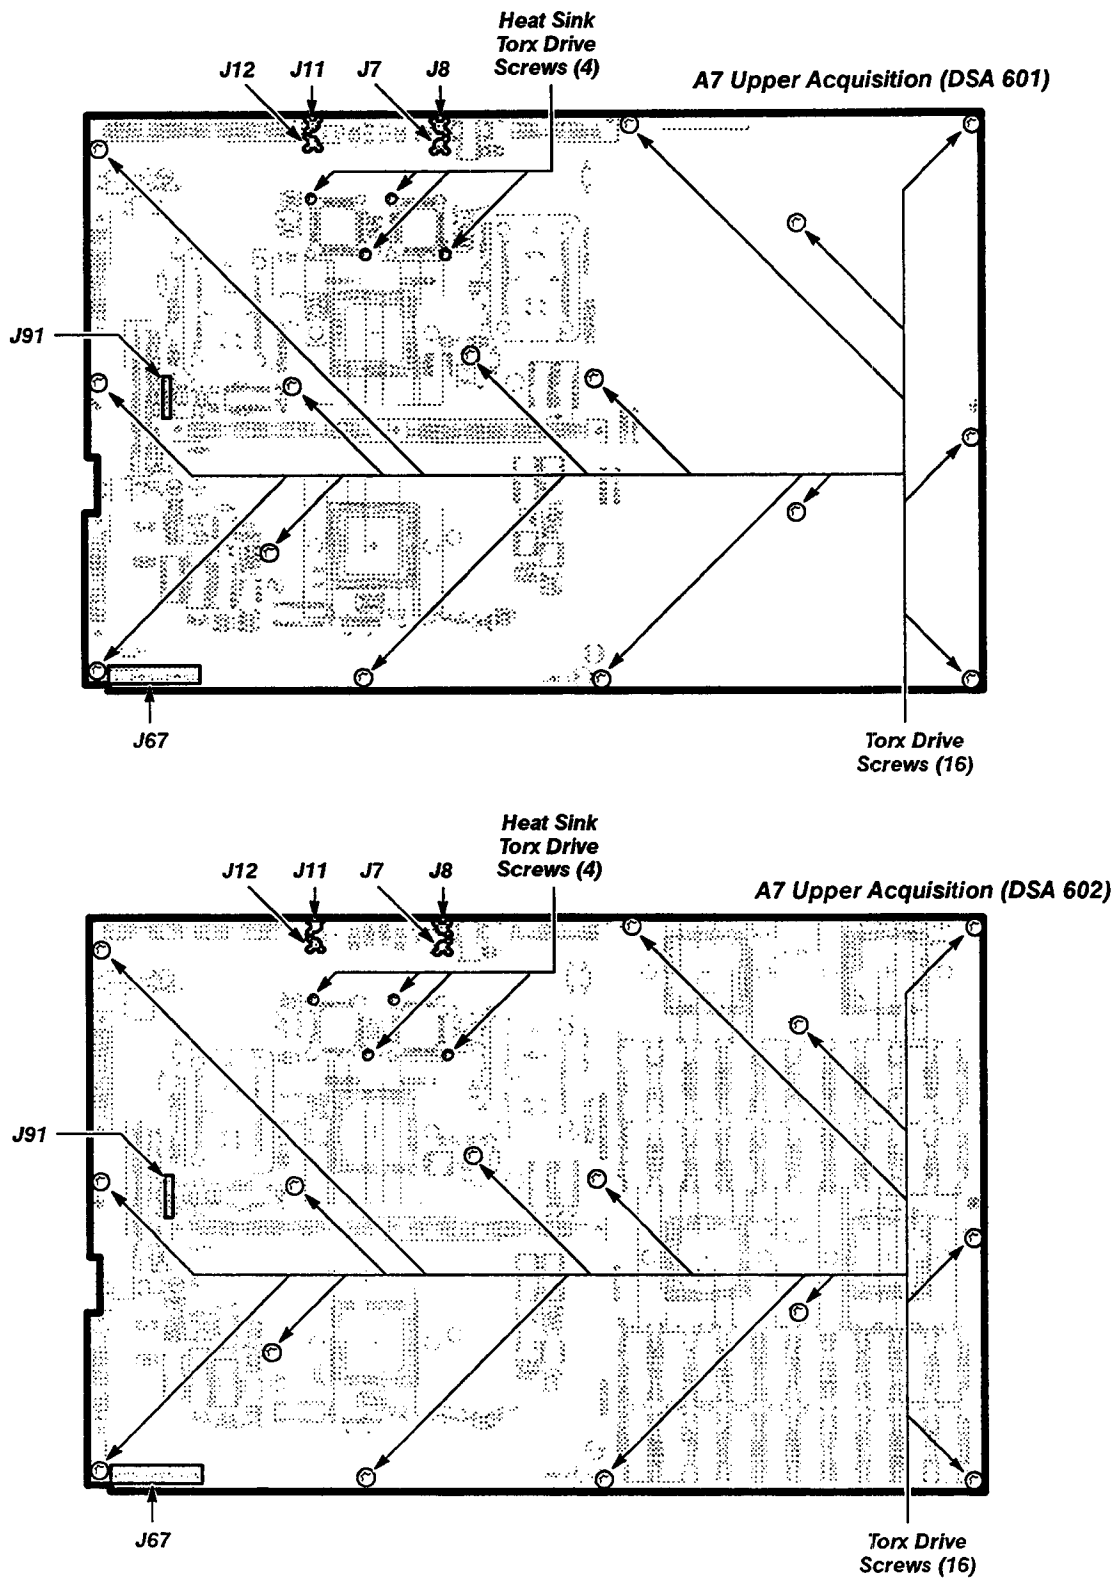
Removing/Replacing the A7 Upper Acquisition Board
